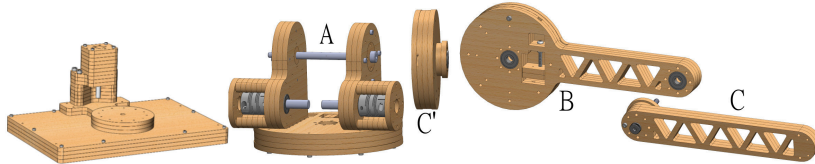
The parts needed to be assembled by user: the base driving the body A, that in turn drives body B and, indirectly through C', body C.
